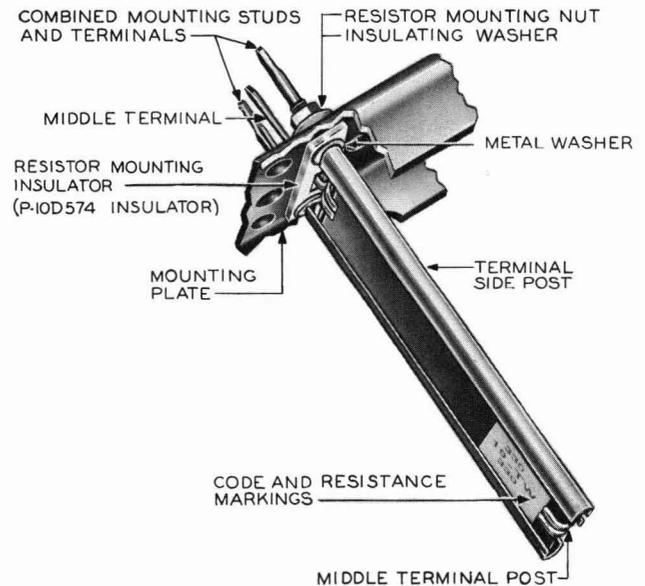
Mounting of 18- and 19-type Double Stud Resistors on Mounting Plate Not Equipped With Insulator Bushings (19-type Resistor Shown)
